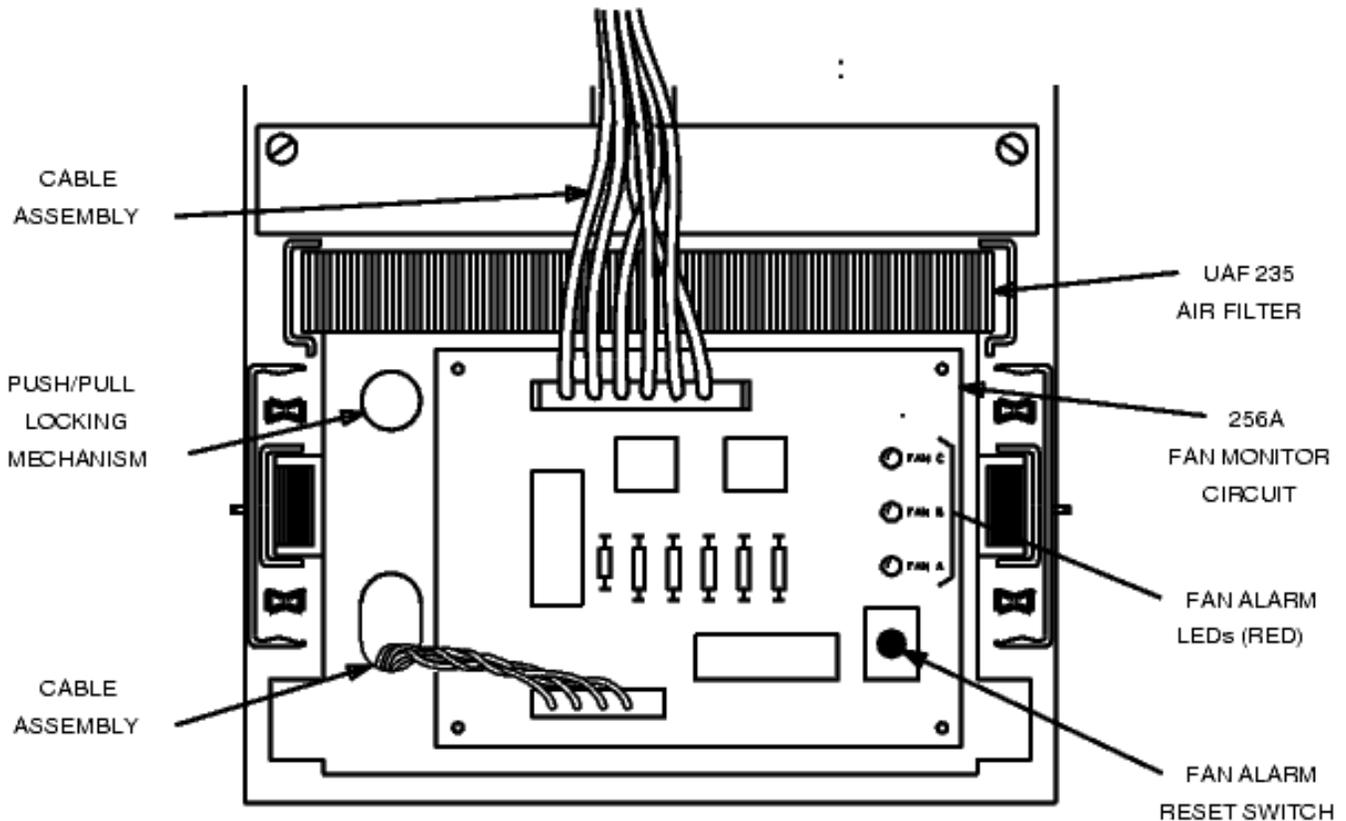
Rear View of ISLU Drawer Fan Assembly
